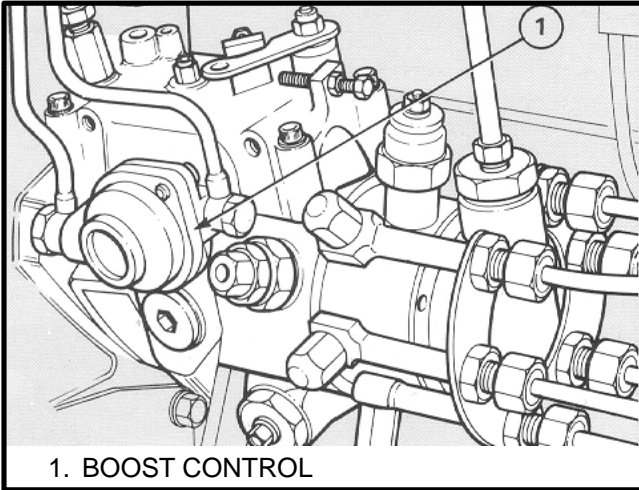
FUEL INJECTION PUMP WITH BOOST CONTROL, ENGINES AB AND YB
